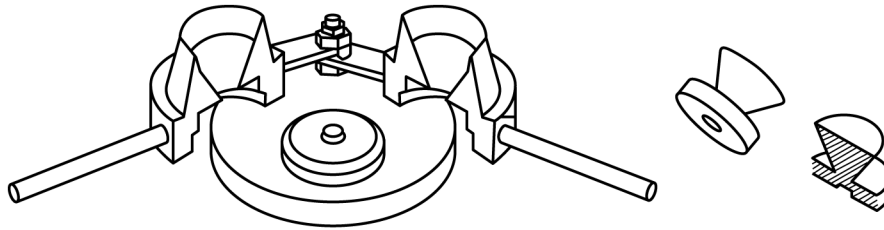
Type B Mold—Center Mold—Center Pour Mold and Sample
